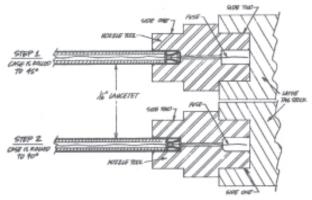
1.5mm Lancejet nozzle crimp tool. MB-63/338.
